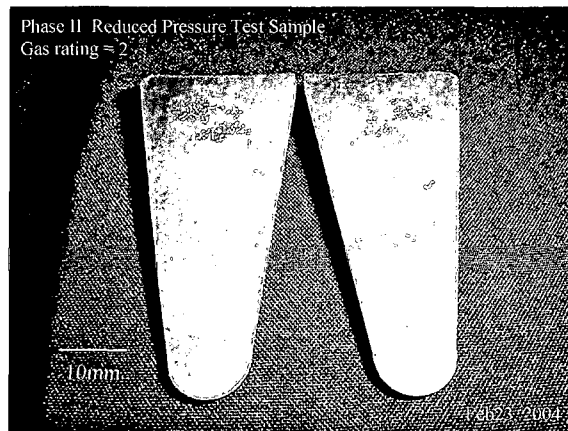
Cross-section of the Reduced Pressure Test sample
